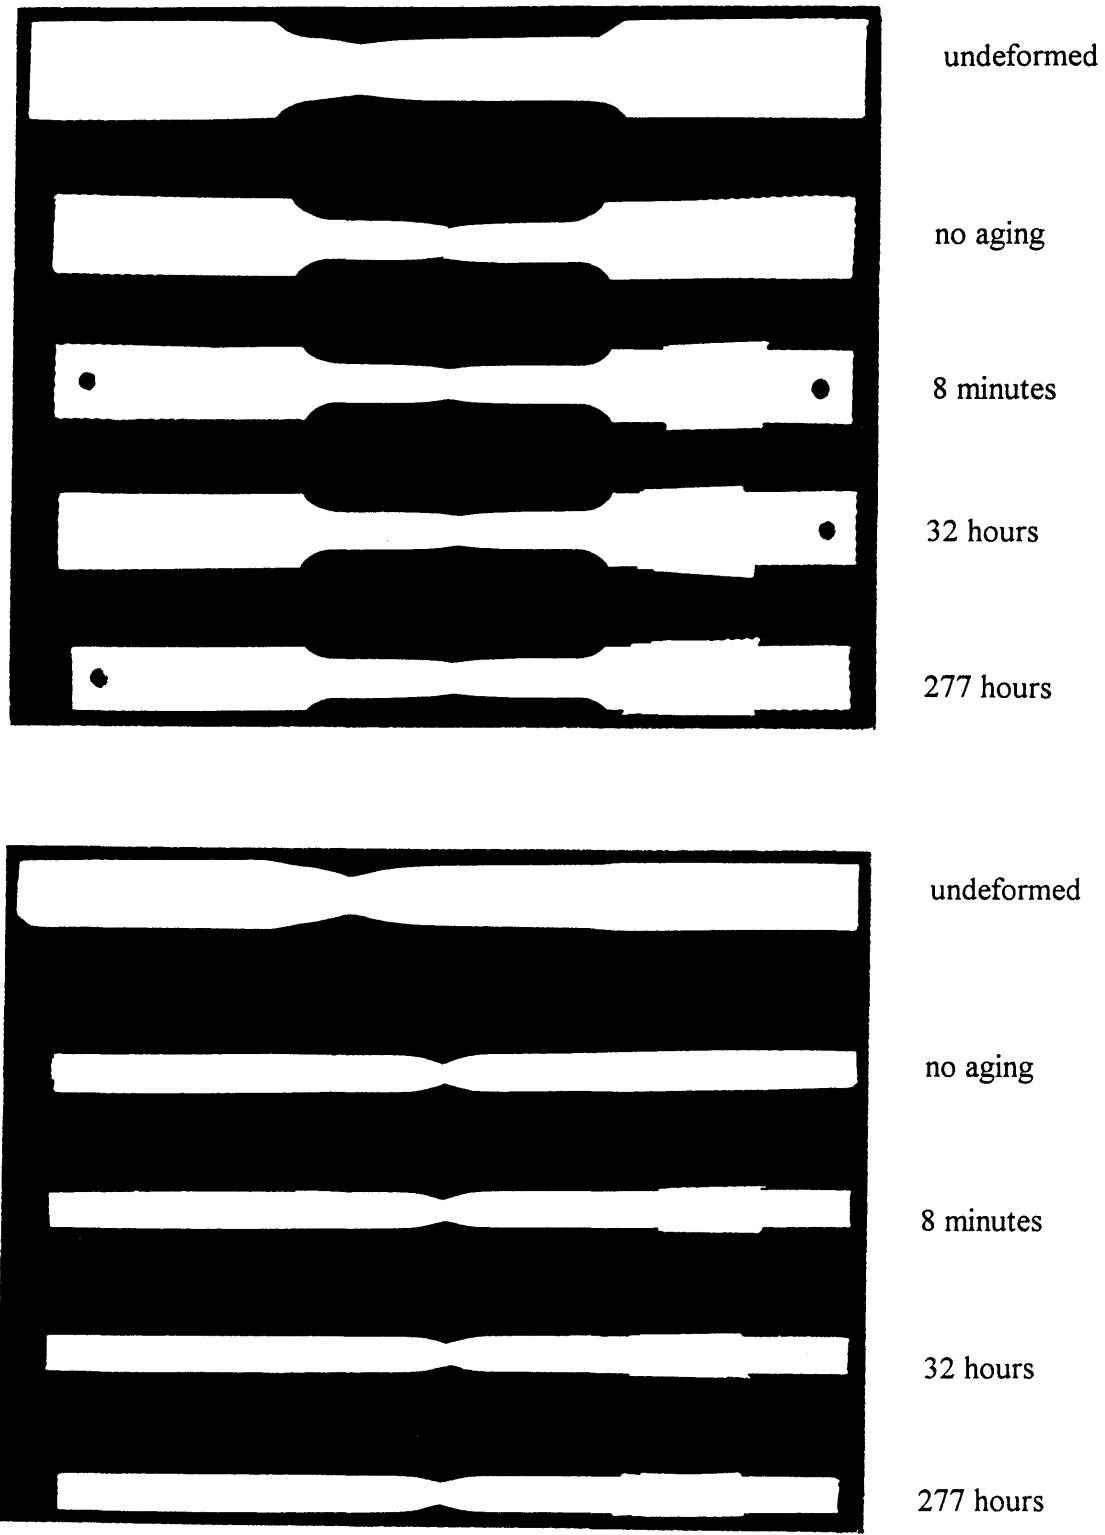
Outlines of the necks after fracture of the deformed and undeformed specimens (specimens solution treated at 930 °C). The neck shapes are similar for all the specimens and delamination cracks can be seen
